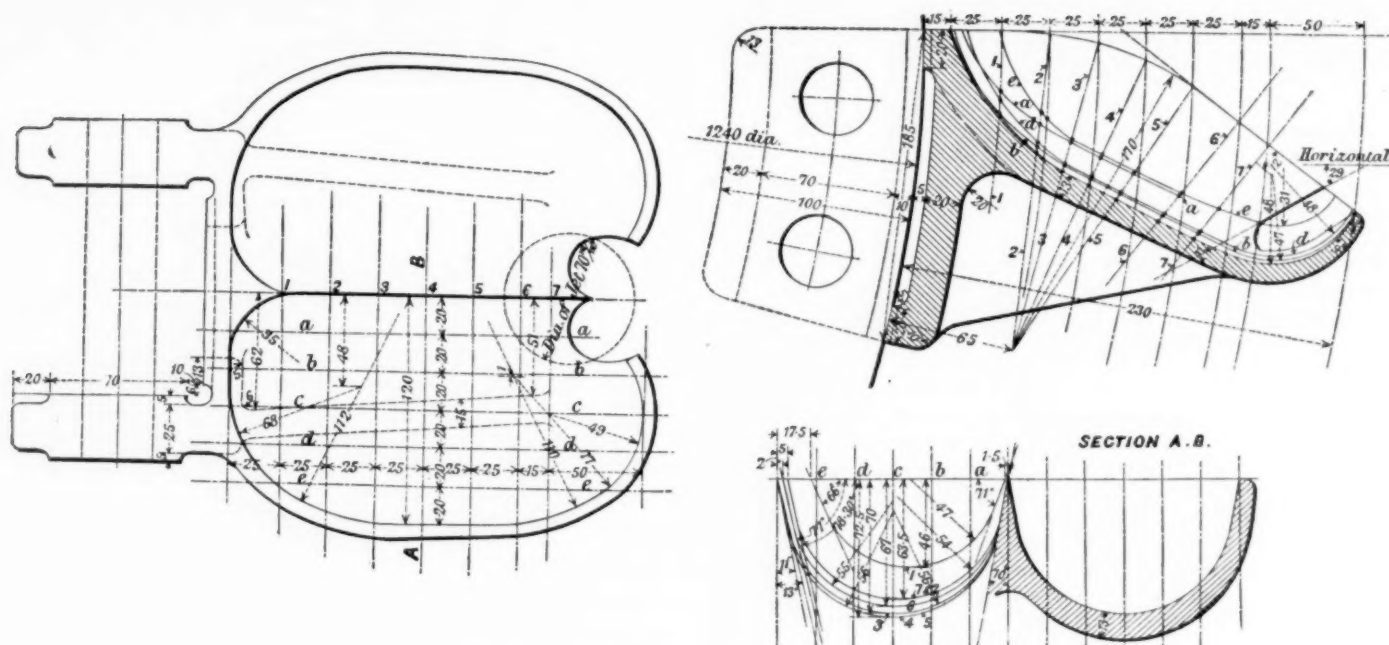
LAYOUT FOR PELTON TURBINE BUCKETS
